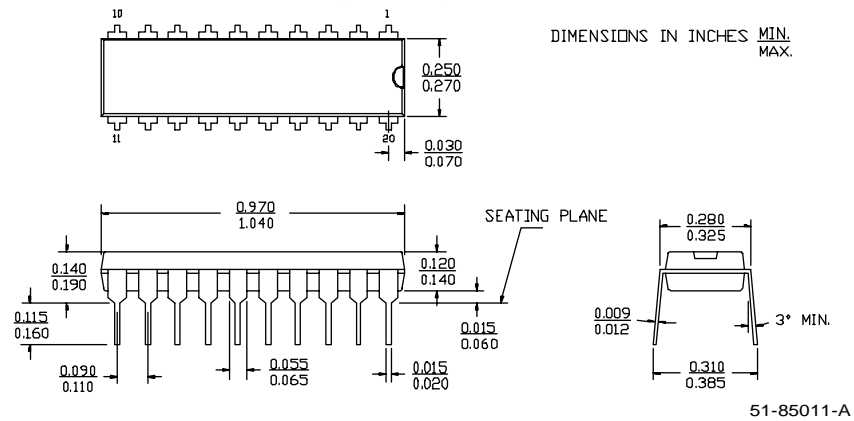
20-Lead (300-Mil) Molded DIP P5
